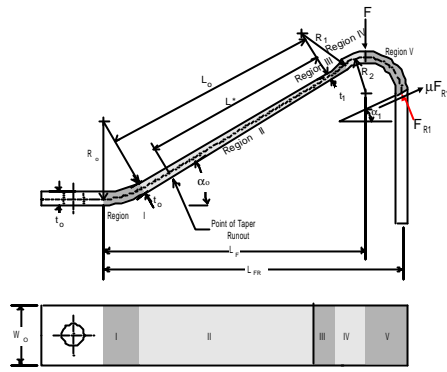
Tapered-thickness holddown spring assembly(TT-HDS).
